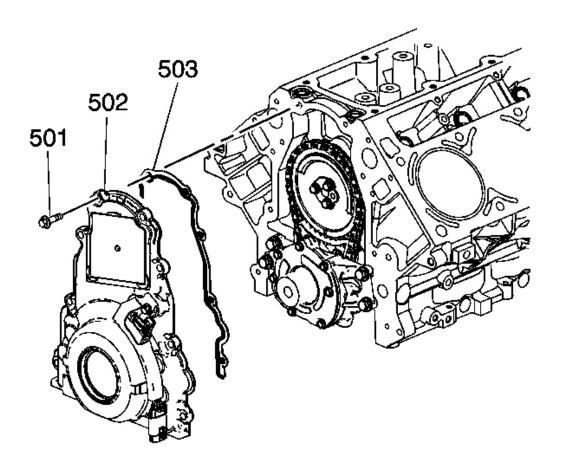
Engine Front Cover, Gasket & Bolts Courtesy of GENERAL MOTORS CORP.
